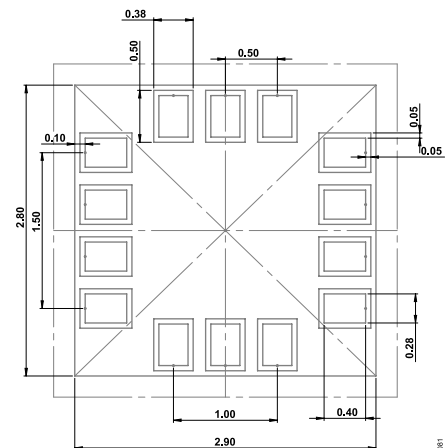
Recommended PCB Footprint, Inner Pads Represent Pads on the ADXL383 Package, Outer Pads Represent the Footprint on the PCB, and All Dimensions in Millimeters
